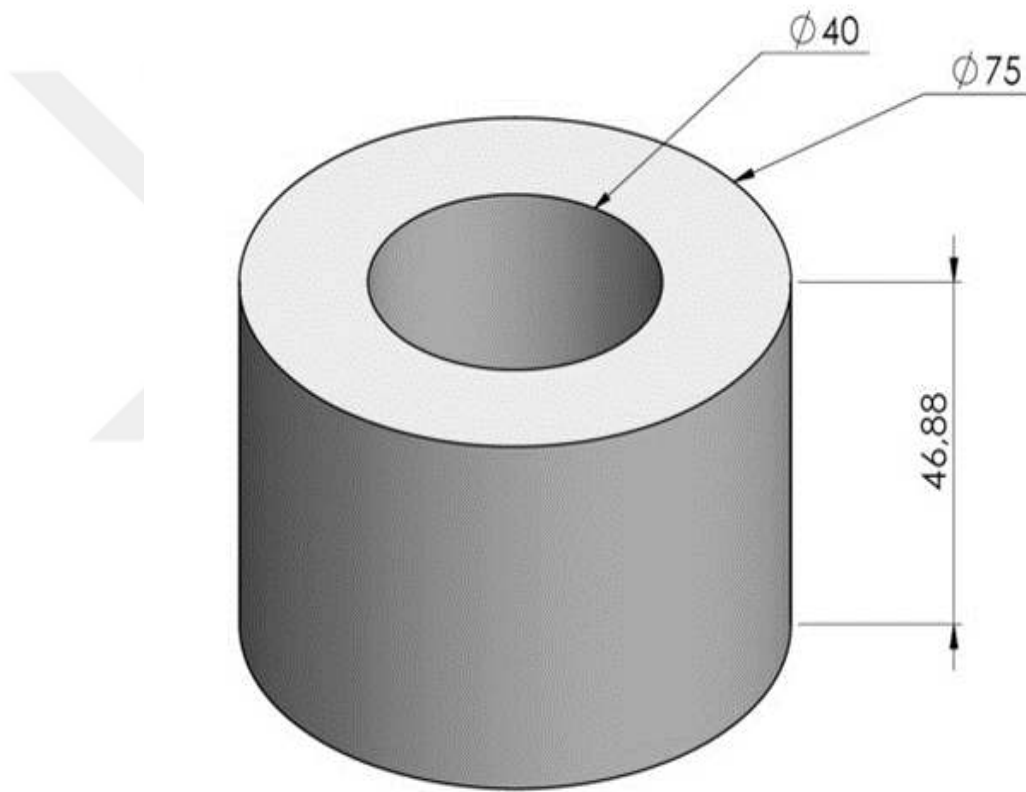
Geometry of the billet (dimensions are given in mm)
